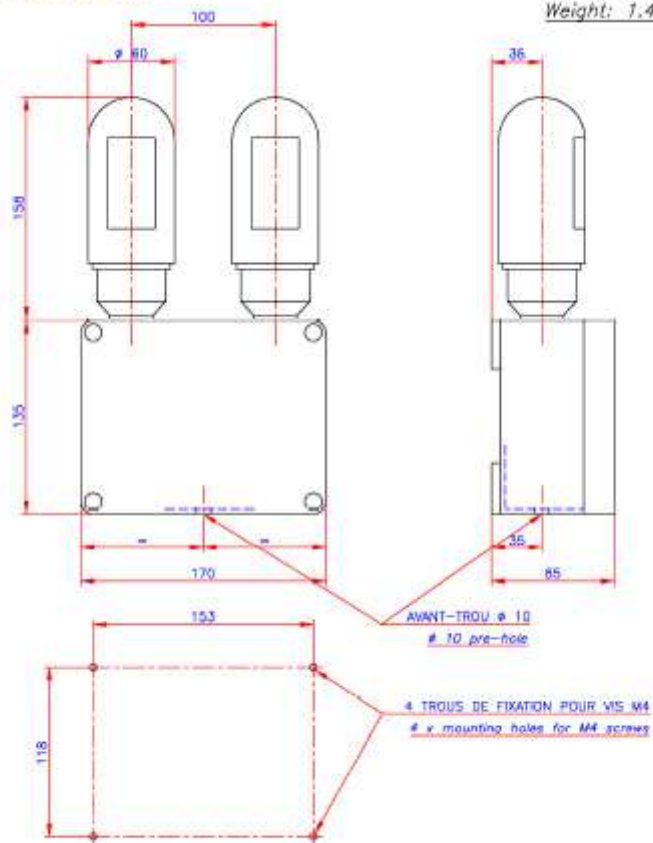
OUTLINE AND MOUNTING DIMENSION PHOTOCCELL DAY/TWILIGHT/NIGHT
